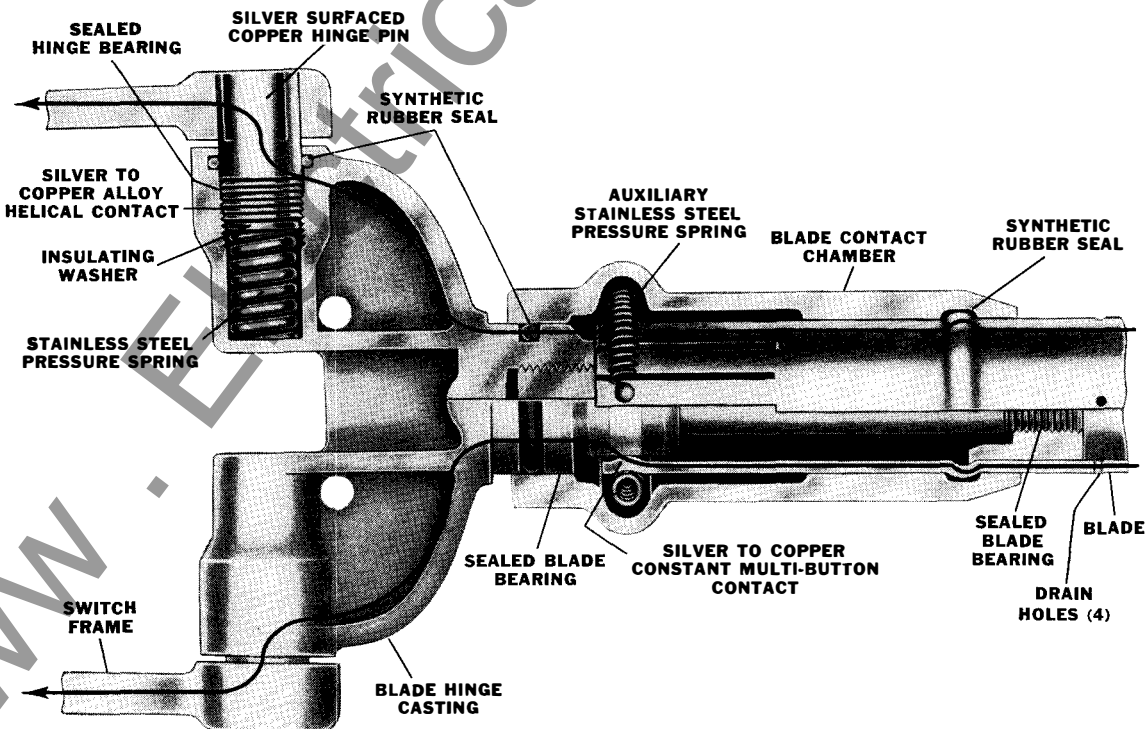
Cut-away View of Hinge and Blade Contact Chamber, 3-inch Bolt Circle
